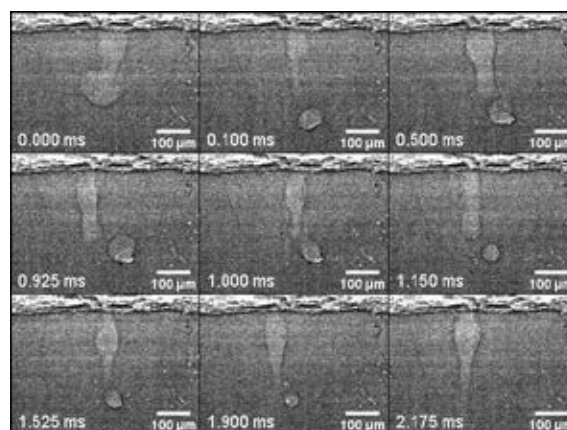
X-ray imaging of formation and degassing of a gas volume inside the melt pool by dynamic beam shaping in AlMg3 during laser welding.
